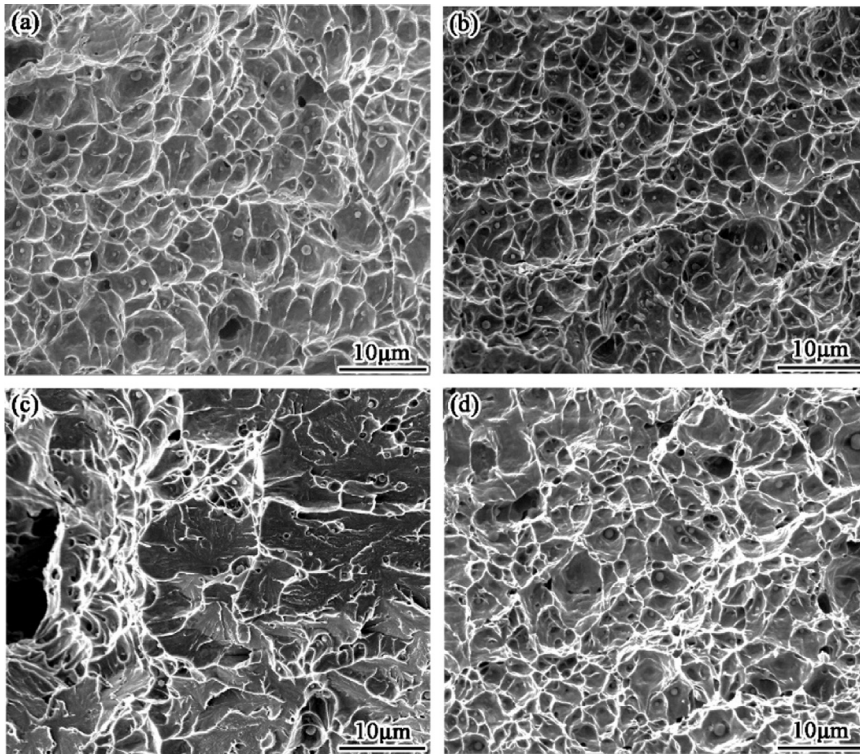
Impact fracture surface at room temperature. (a)1#, (b) 2#, (c)3#, (d)4#.
